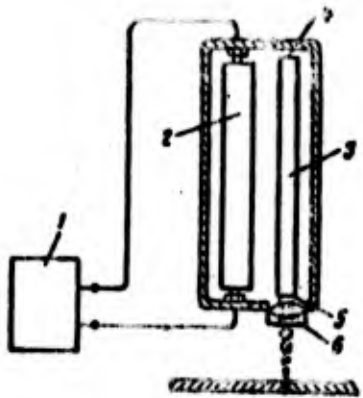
Welding by light beam: 1 - power supply; 2 - tube; 3 - ruby rod; 4, 5 - faces of rod; 6 - lens.
